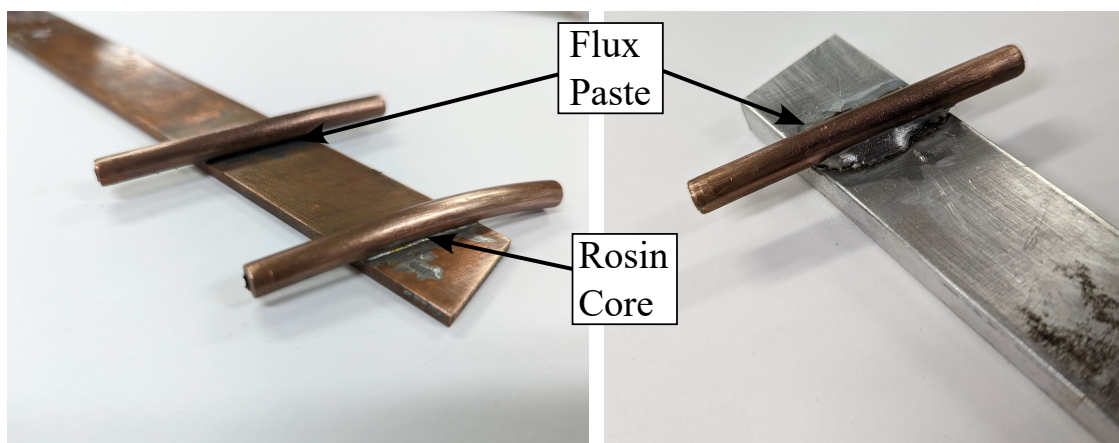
Sample 1/4" copper tubing soldered to copper and 6061 aluminum bars showing sample solder joints with the desired characteristics. Superior NO. 1265 flux paste was used for both samples along with a separate solder using a rosin flux core solder.
